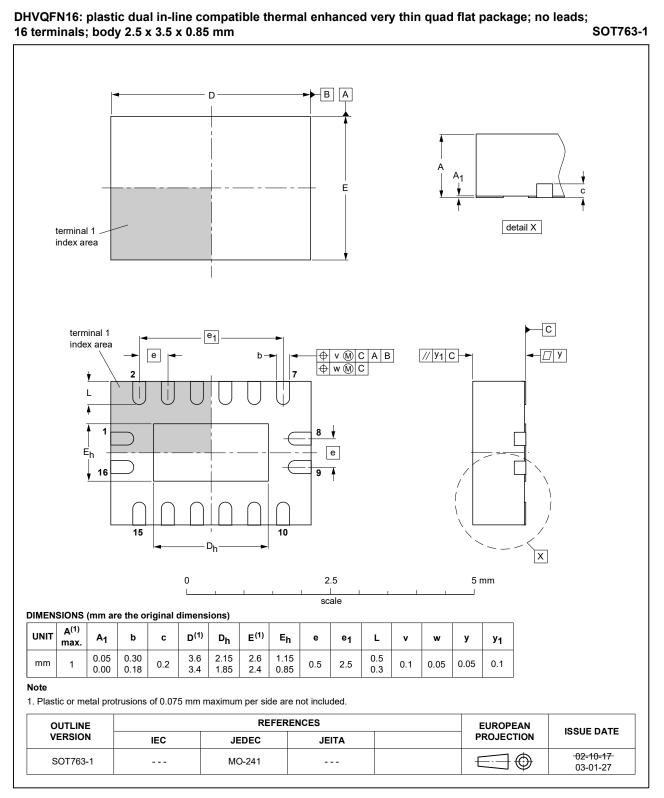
Package outline SOT763-1 (DHVQFN16)
